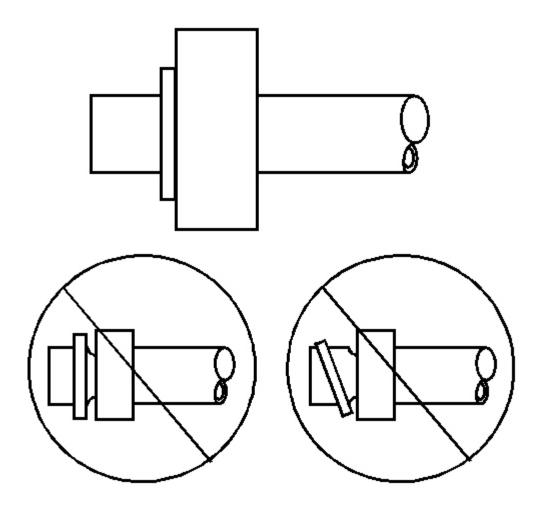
Identifying Good And Bad Sealing Washer Positions Courtesy of GENERAL MOTORS CORP.
